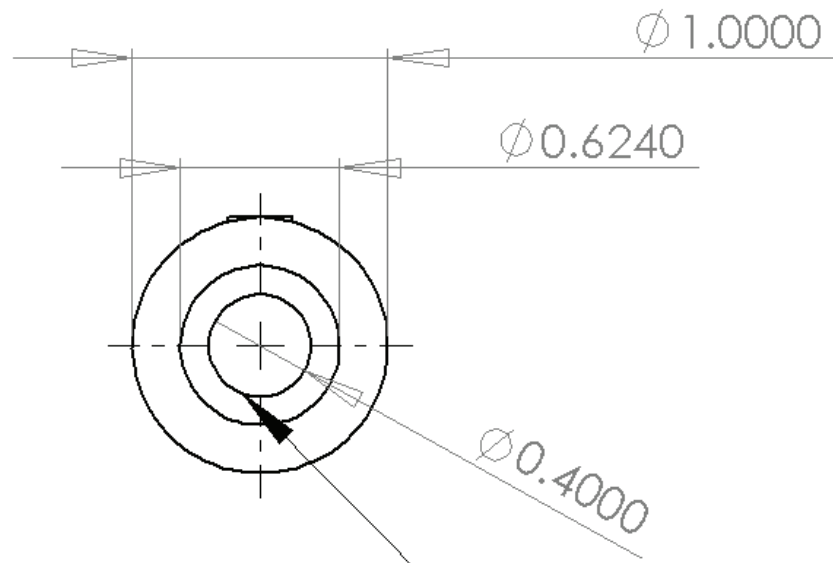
Mechanical drawing of the side view of the part *magnet sleeve.sld
